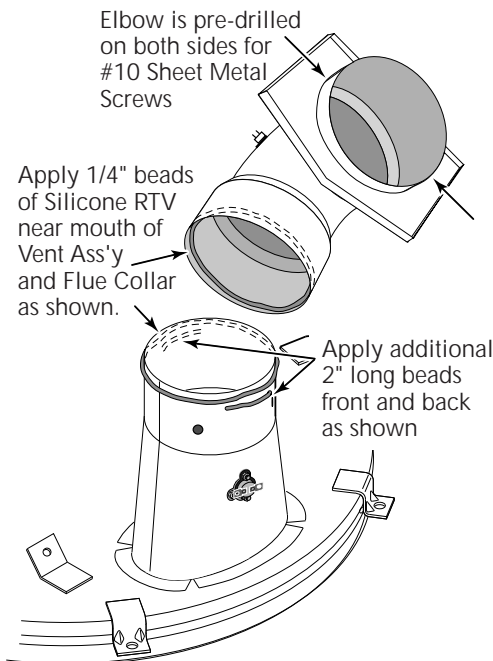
Apply Silicone RTV beads as shown. Spread out RTV with a tongue depressor or a rubber gloved finger.
